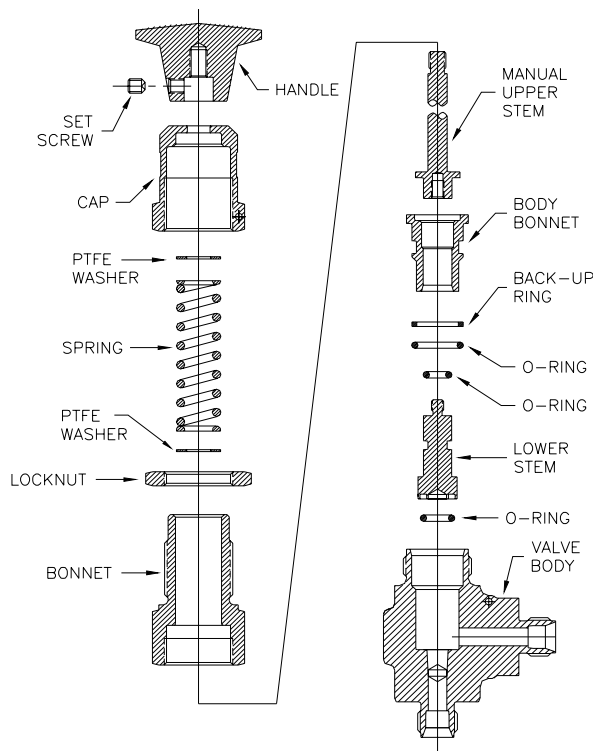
RL Series Relief Valve with Manual Override Exploded View
